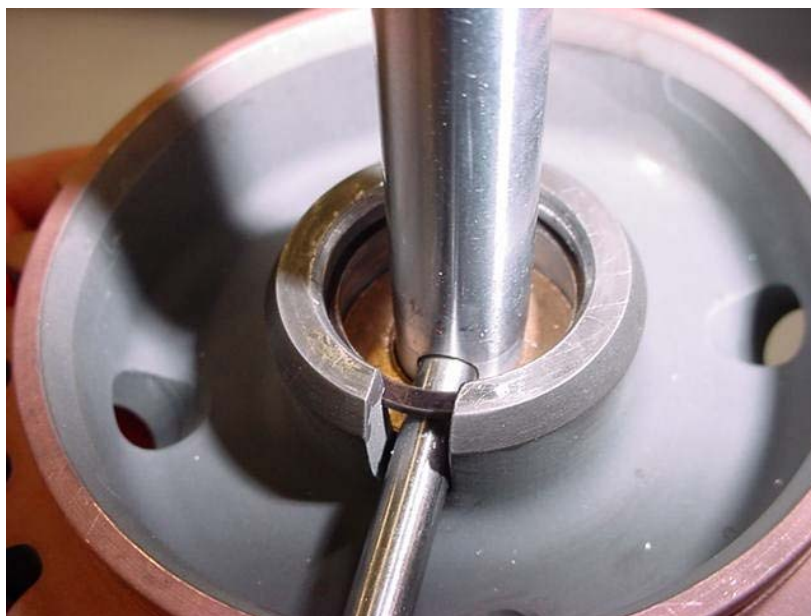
Finished Assembly showing a Fully Seated Spiral Retaining Ring
